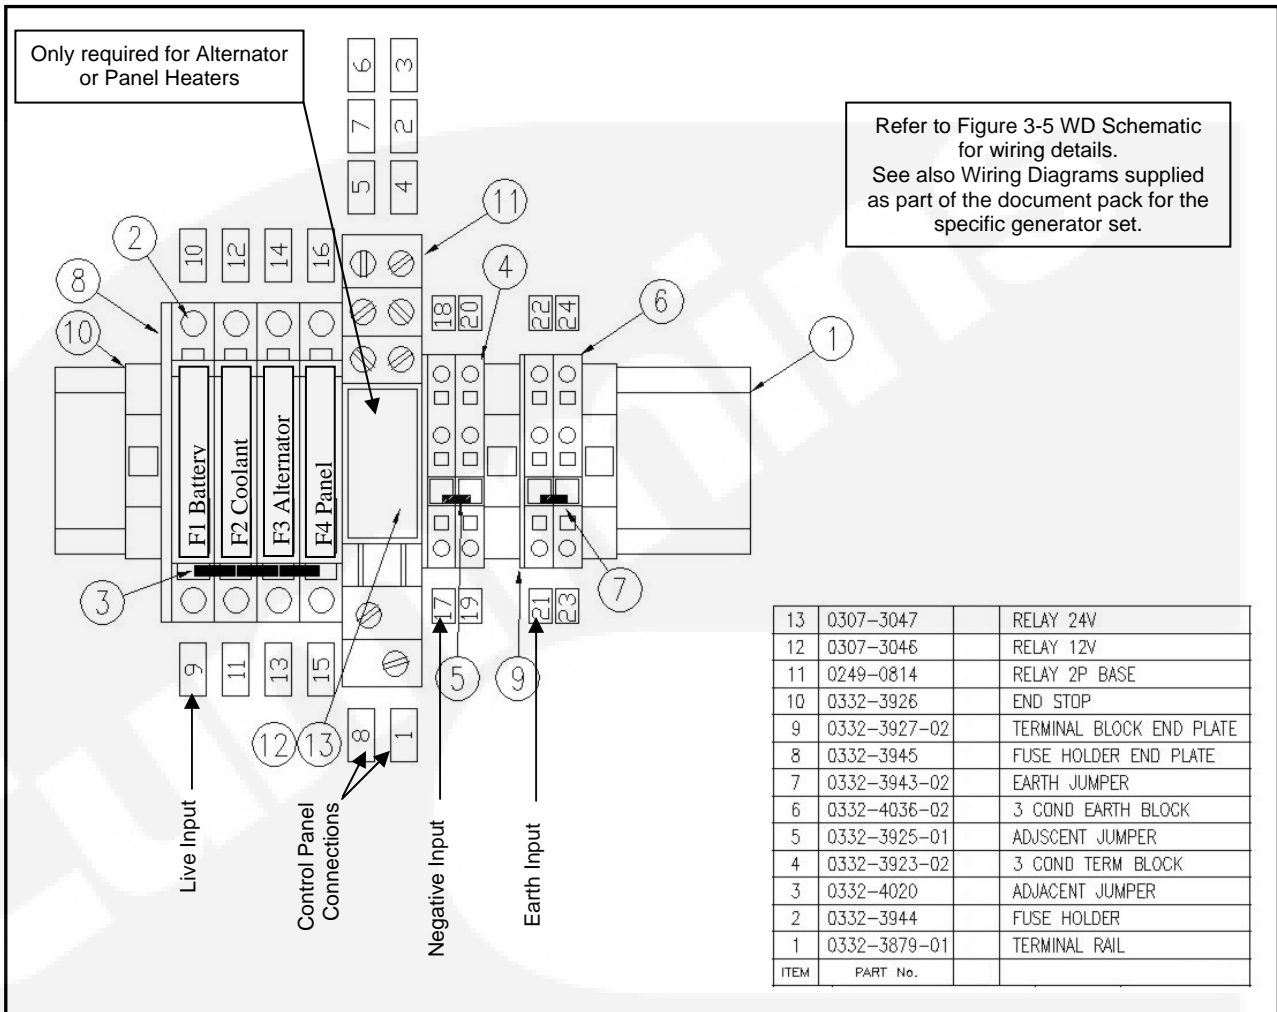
Terminal Assembly for C70 to C250 Sets
